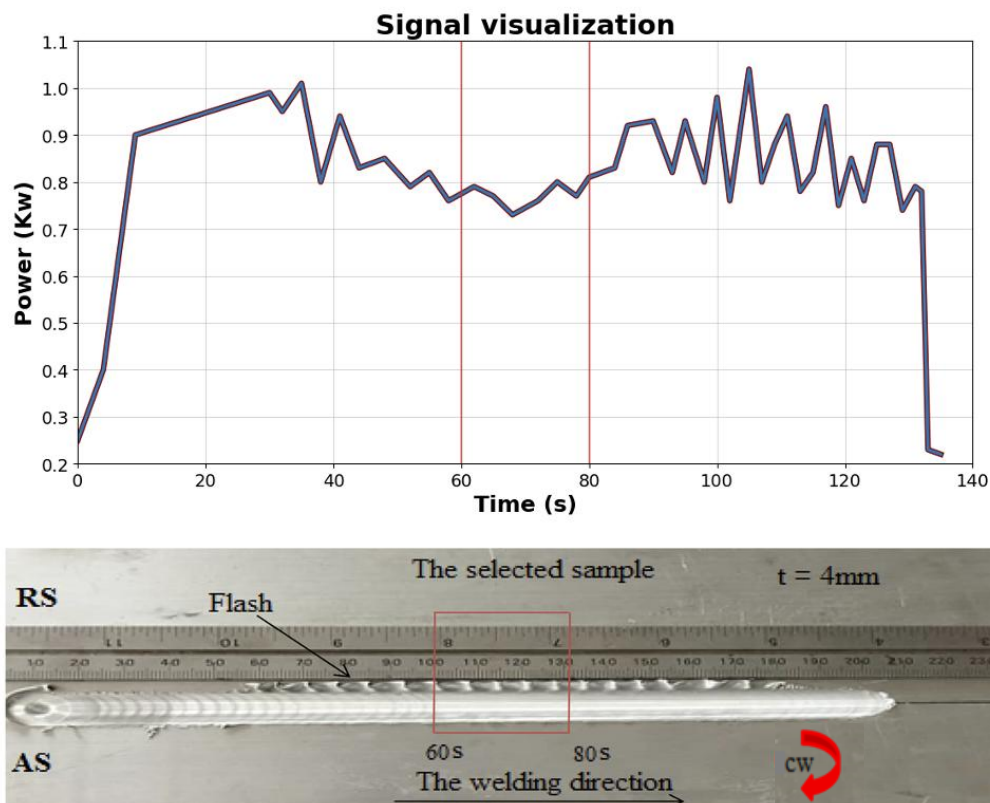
The location of the selected power signal and the defective sample area of a 4 mm pin size, bottom welding
